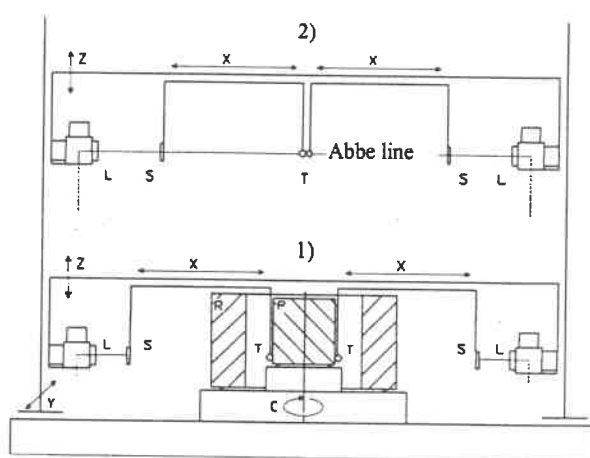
Measurement of the outer diameter of a cylinder carried out with two probing systems. P cylinder to be measured, R form reference ring, L laser interferometer, S plane mirror, T probing system, X horizontal carriage, Y horizontal frame, Z vertical carriage, C rotating table.
